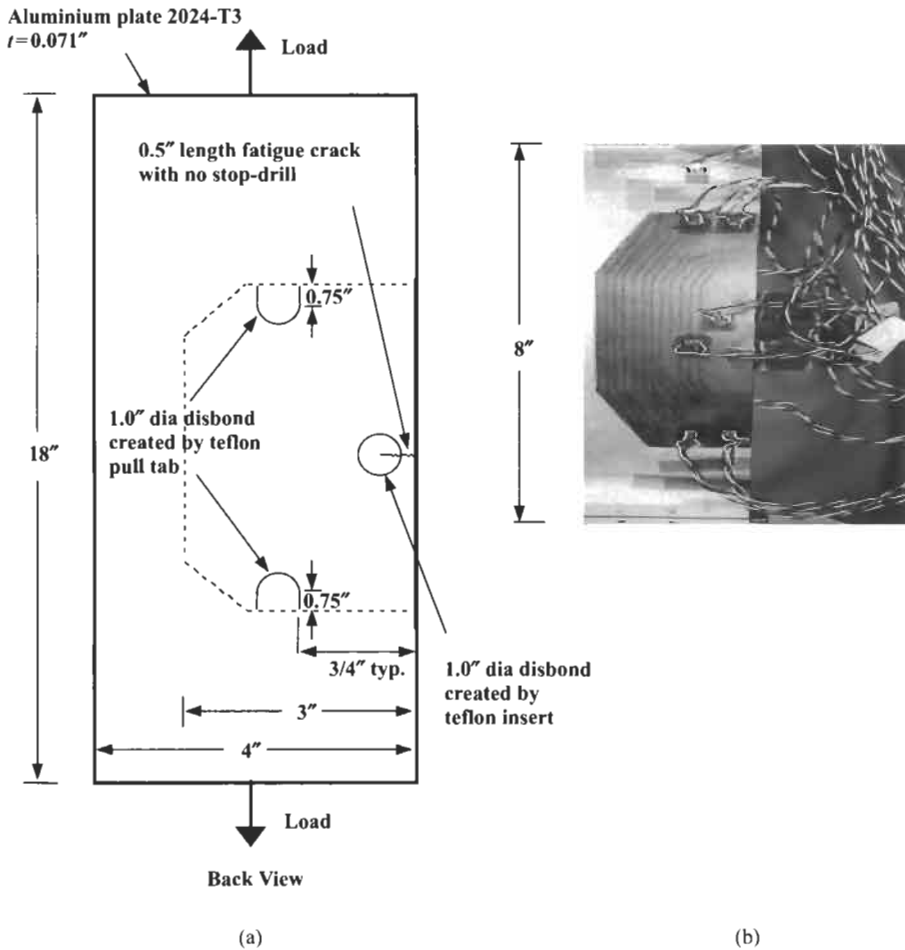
13-ply boron-epoxy composite doubler coupon: (a) schematic showing embedded flaws comprising a fatigue crack with a 1.0" (25 mm) diameter co-located disbond centered over the crack tip and 1.0" (25 mm) diameter disbonds in the load transfer region (edges of bondline); (b) photograph of the coupon during fatigue test.
